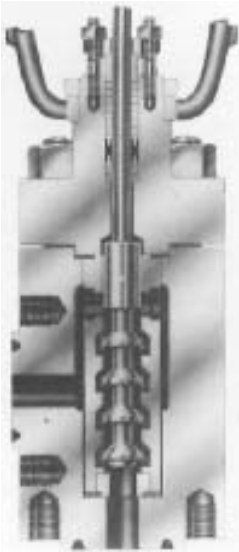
Cage valve with bottom access (Copes-Vulcan)
